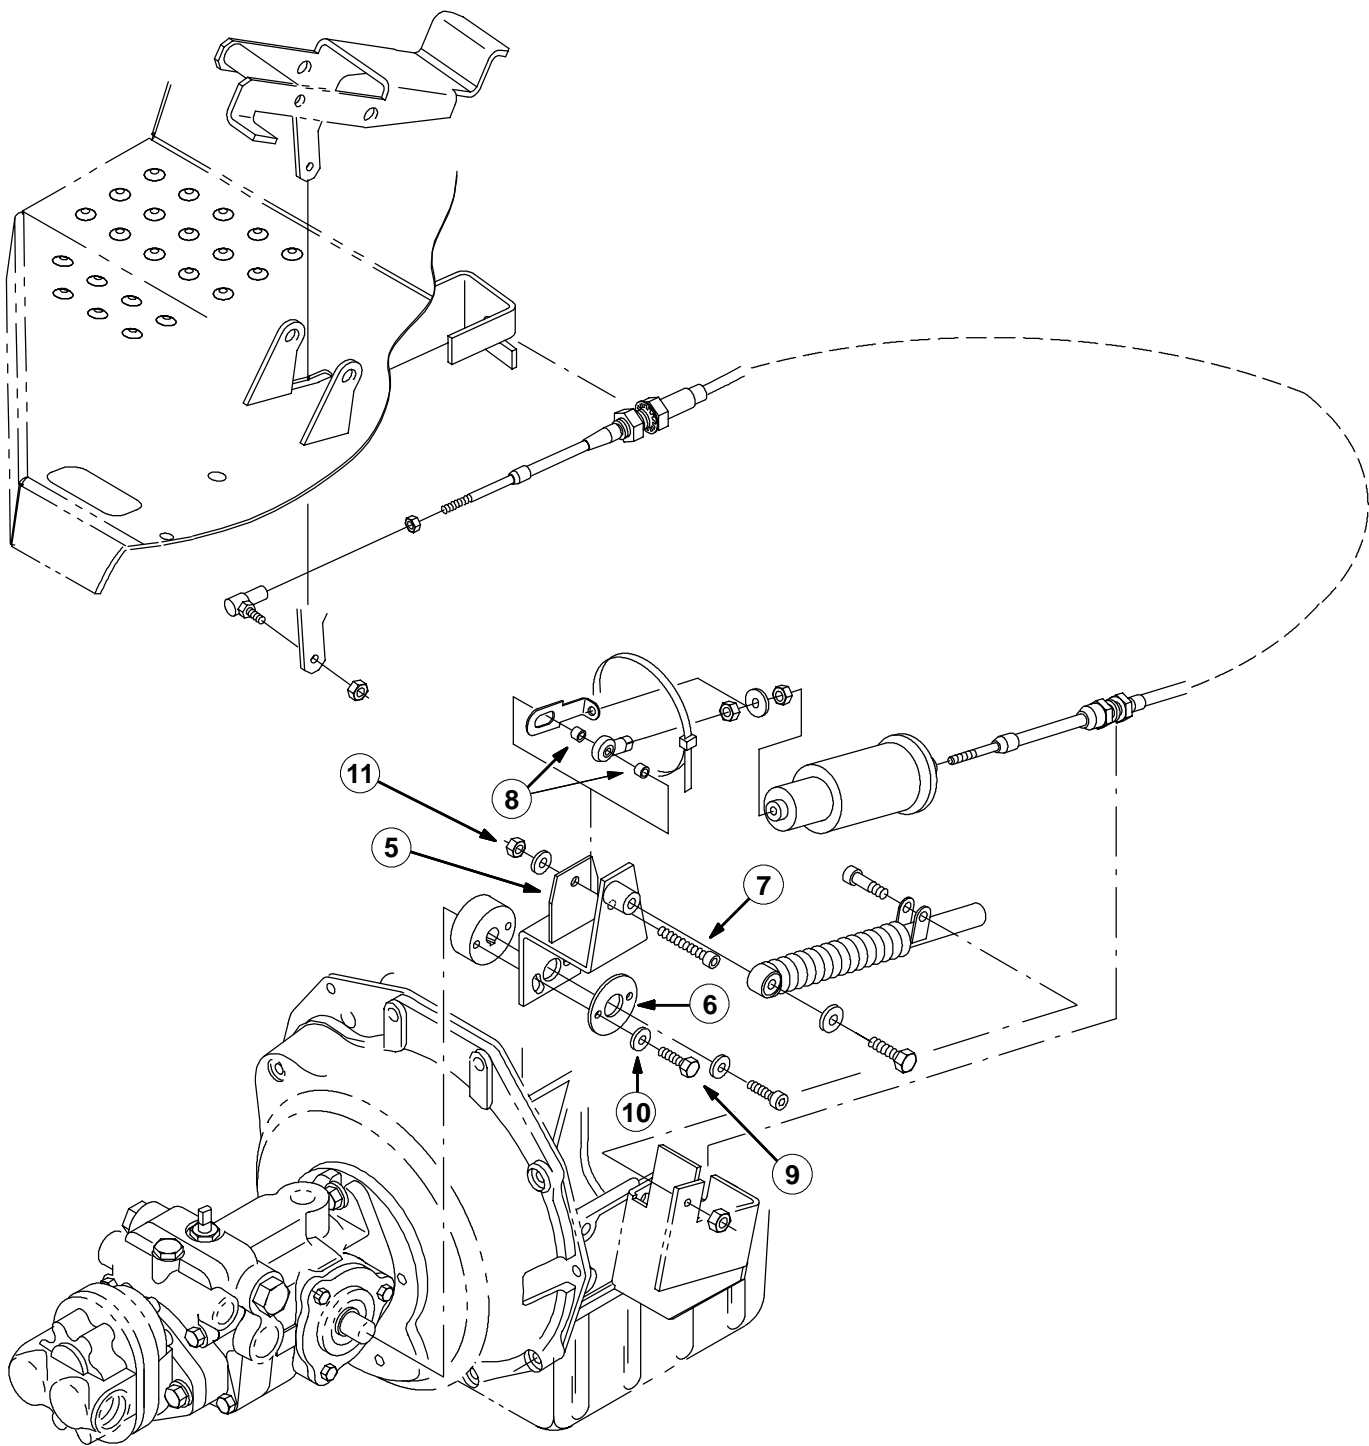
HYDRAULIC PUMP LINKAGE GROUP BREAKDOWN
